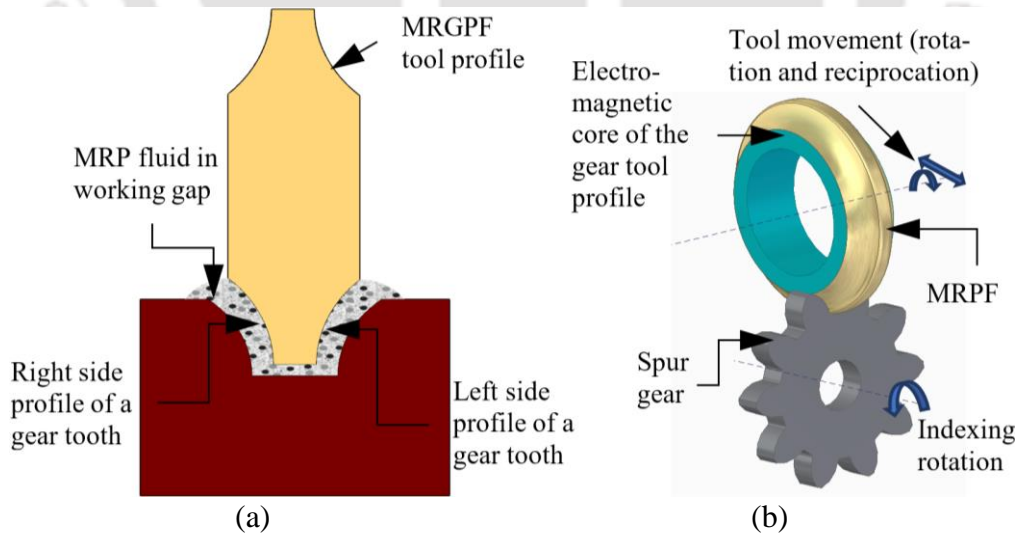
(a) Finishing mechanism of MRGPF process, and (b) MRGPF tool movement similar to disk wheel gear grinding [84]
